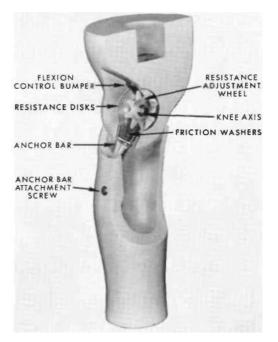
Cutaway of knee block and shank assembly showing most recent (January 1965) version of Northwestern University disk-friction system.
